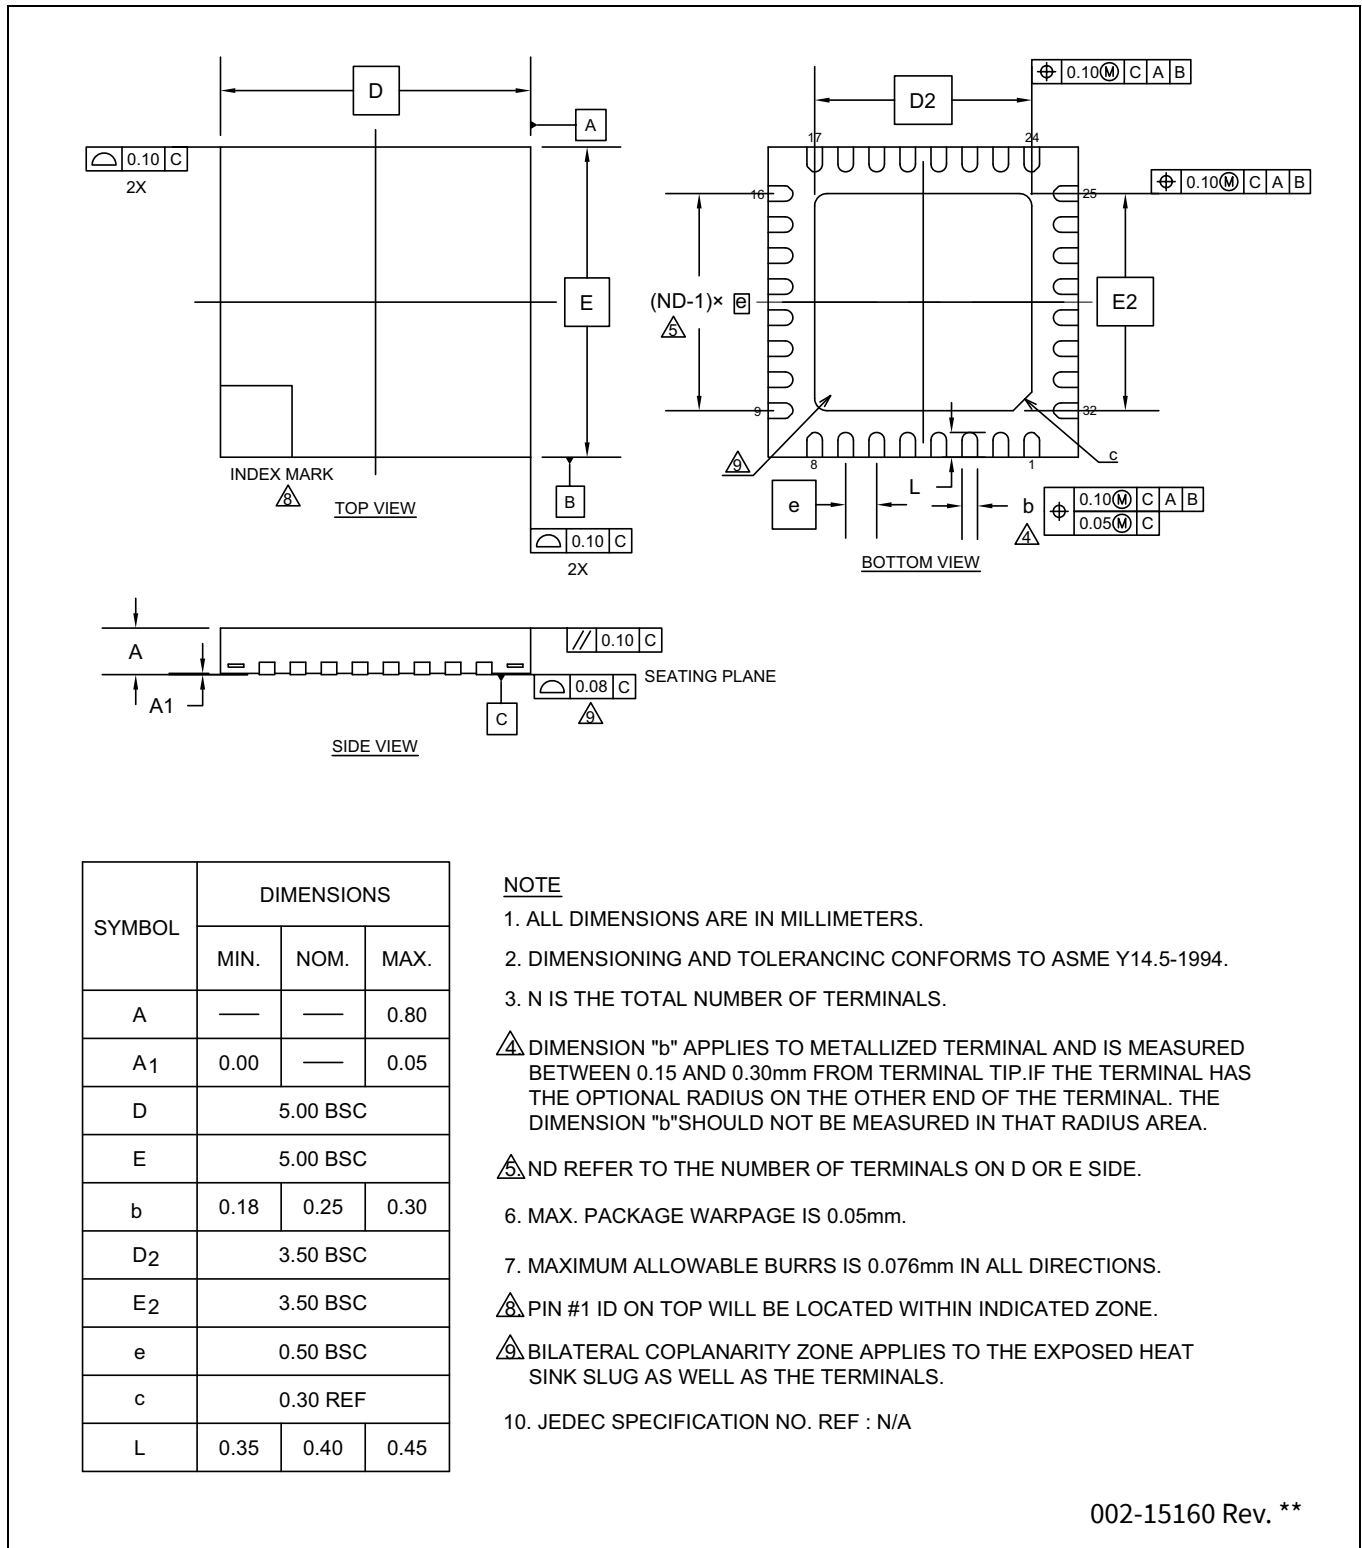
32-lead QFN ((5.0 × 5.0 × 0.8 mm) WNP032 3.5 × 3.5 mm E-pad (Sawn)) package outline (PG-VQFN-32), 002-15160
